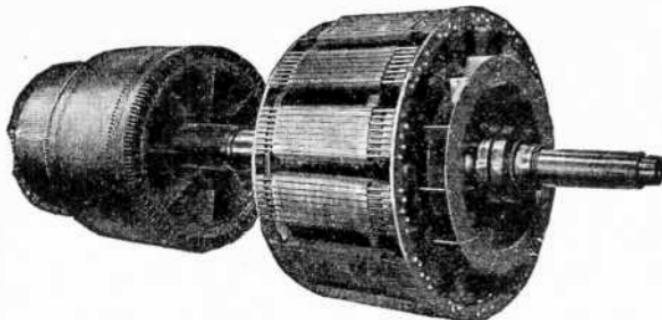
,088.—Westinghouse synchronous motor generator rotating part. *The rotor* consists of the motor rotating field and generator armature mounted on a common shaft, the shaft being arranged for two or three bearings, according to the construction used. The synchronous motor field is equipped with a damper winding which renders the motor stable in operation and readily self starting when a reduced voltage is applied to the stationary armature. While the starting $kva.$ required is dependent on the resistance of the cage winding, and all motors start with a very reasonable $kva.$, the resistance of this winding is not increased to a point where the stability will be impaired. A low starting $kva.$ is desirable, but the starting conditions are not allowed to affect the design so as to impair good operating stability. The generator armature is of the standard drum type with either a series or multiple wound, depending upon the size. The multiple wound armatures are cross connected by connections in the rear joining points of equal voltage.
